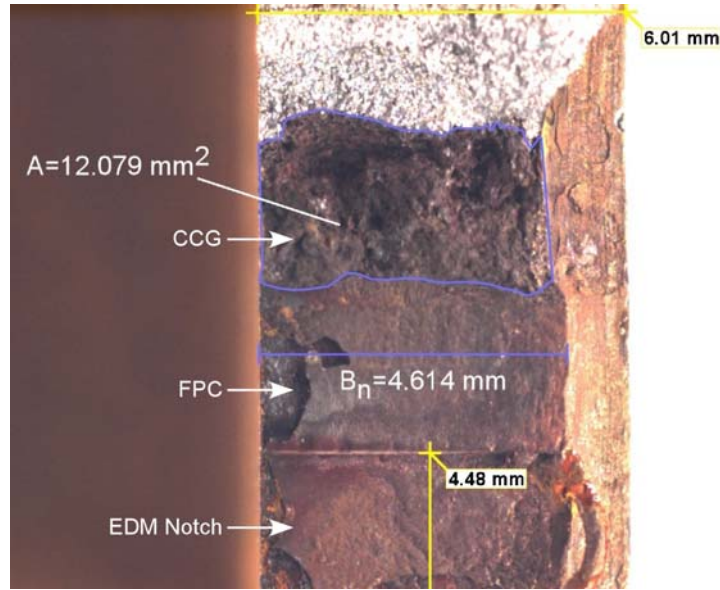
Fracture surface of the SEN(B) specimen, I22W4SB, crack opened by cyclic loading after testing.
